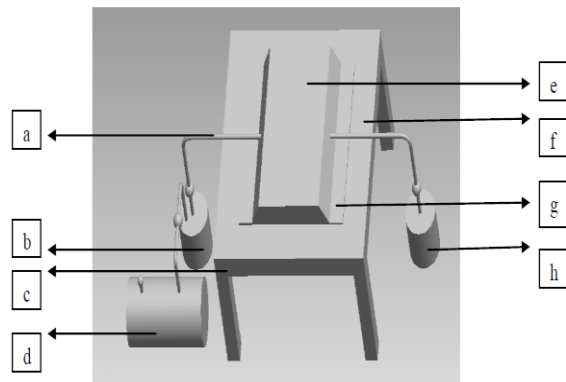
Vacuum assisted resin transfer molding (a)- resin distribution pipe, (b) – resin trap, (c) – working table, (d) - compressor (e) – mold, (f) – working table, (g) – vacuum bag, (h) – polymer container
